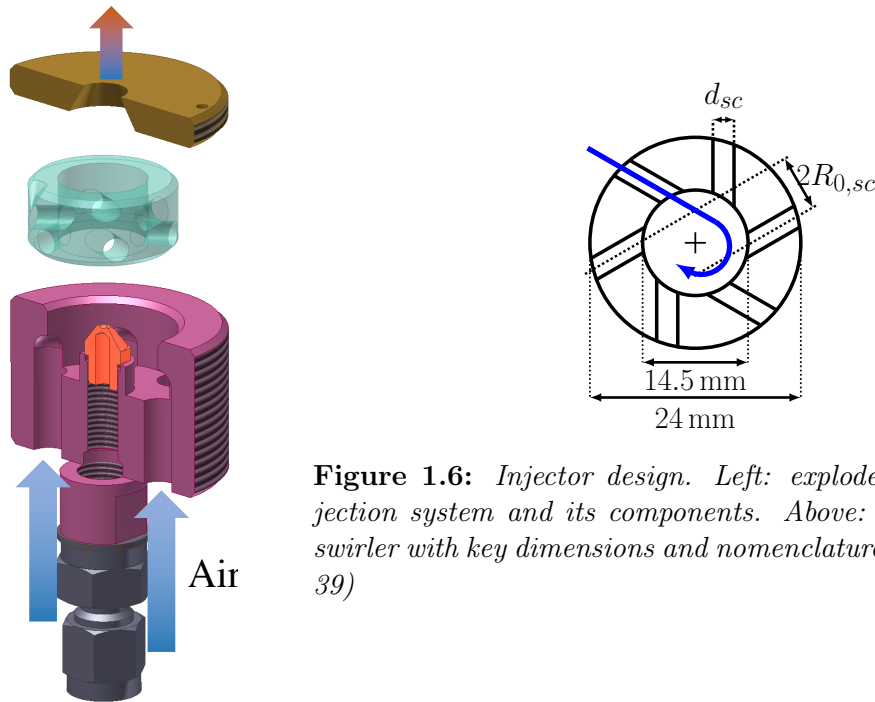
Injector design. Left: exploded 3D view of the injection system and its components. Above: schematic cut of the swirler with key dimensions and nomenclature. (repeated from page 39)
